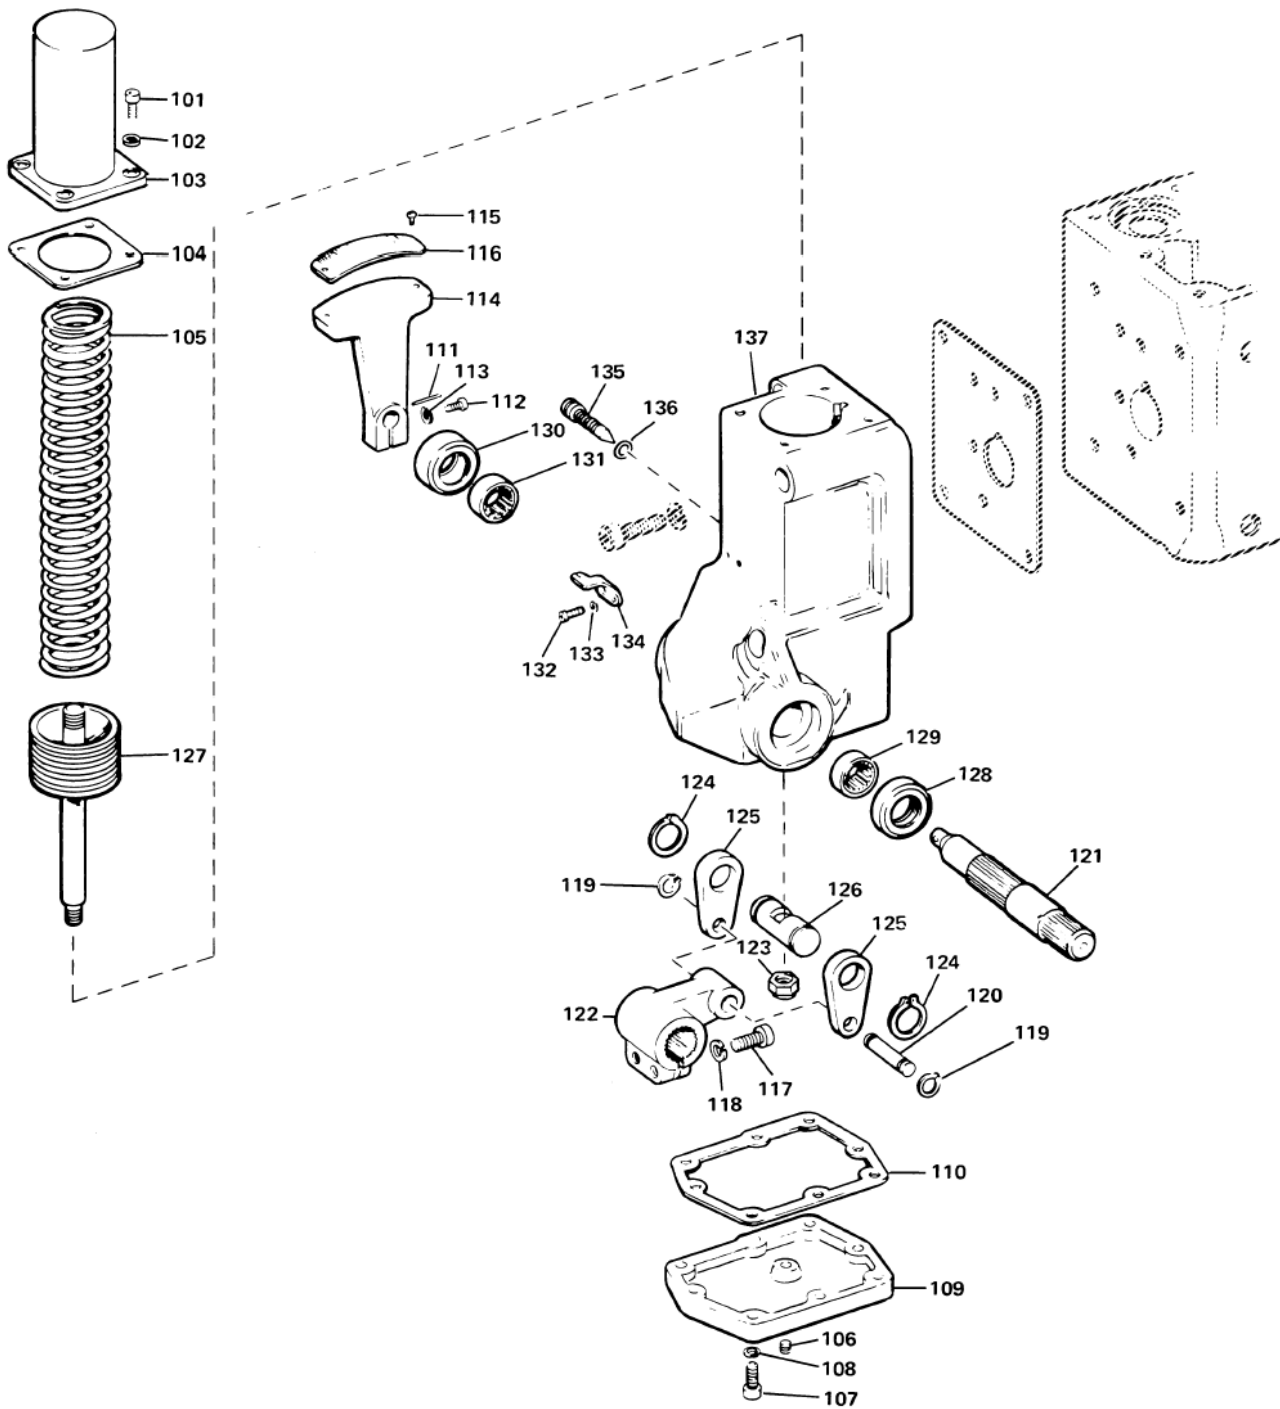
Exploded View of Spring-Loaded Power Cylinder
